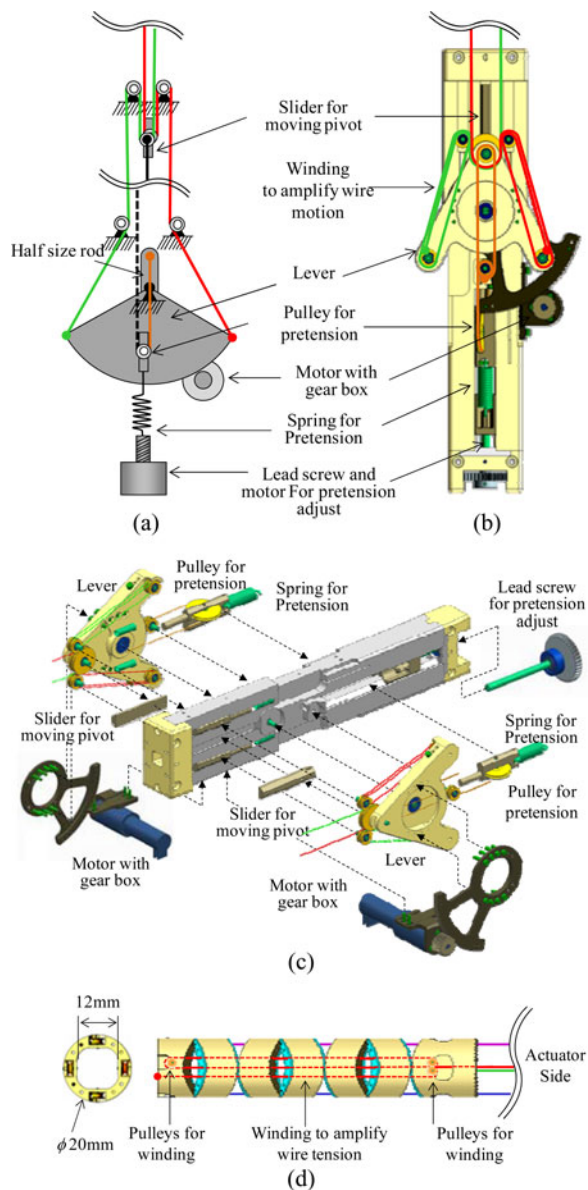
Detailed Design of a 2-DOF Manipulator.
